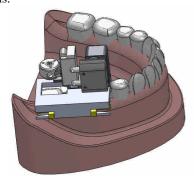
Endodontic Micro Machine Mounted on a Lower Teeth
